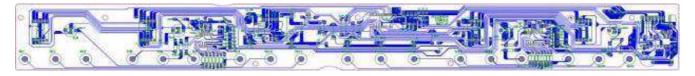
11 - PCB layout of Control PCB for models C74E-AABC02 and C74E-AABC03
